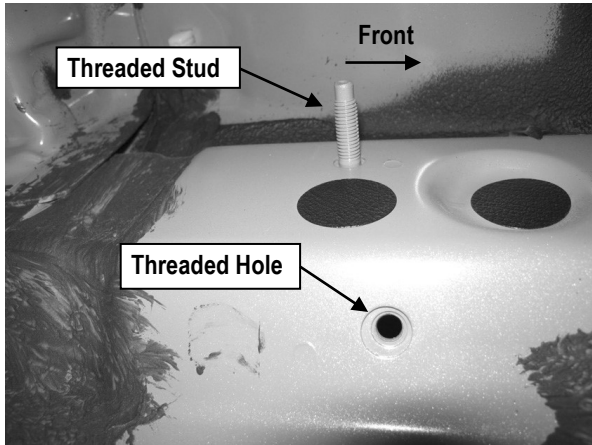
Mounting Bracket (DFM+DFB) Assembly
